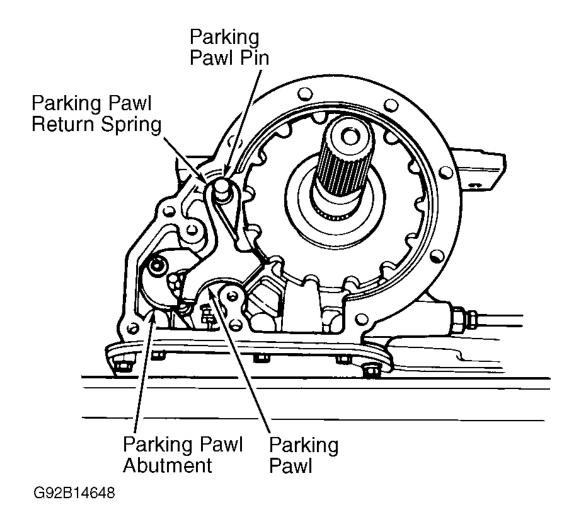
Removing Parking Mechanism Courtesy of FORD MOTOR CO.
